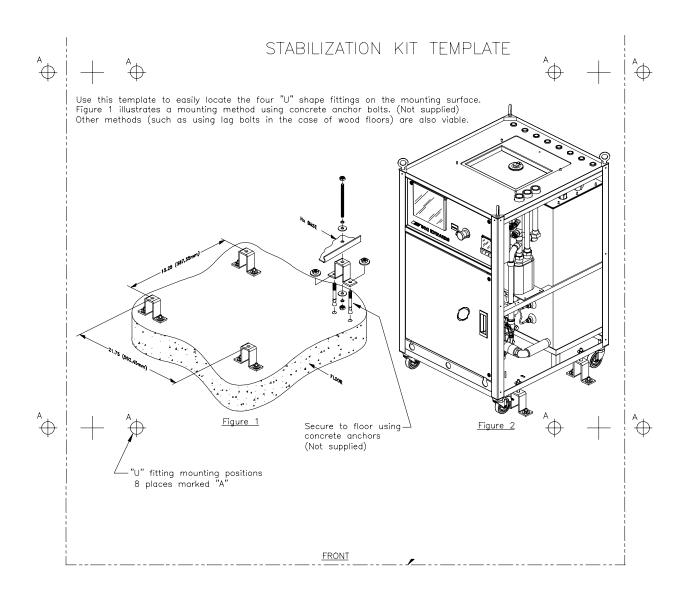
HTU 108 Stabilization Kit Installation (NOT TO SCALE)
